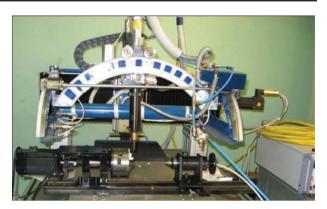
Technological complex for laser welding of expansion bellows
